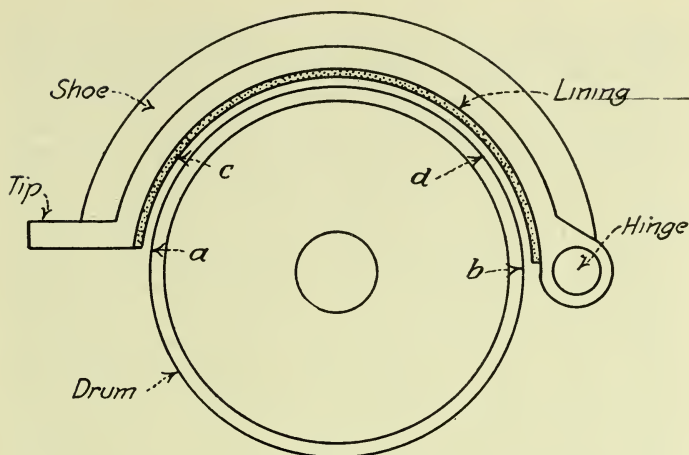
AN EXAMPLE OF FAULTY BRAKE DESIGN
